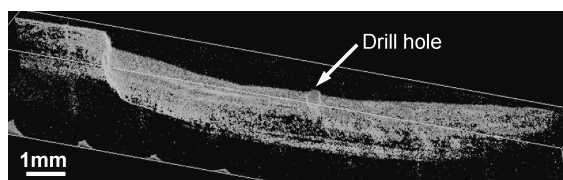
3D image of a fatigue crack in an FSW joint.
